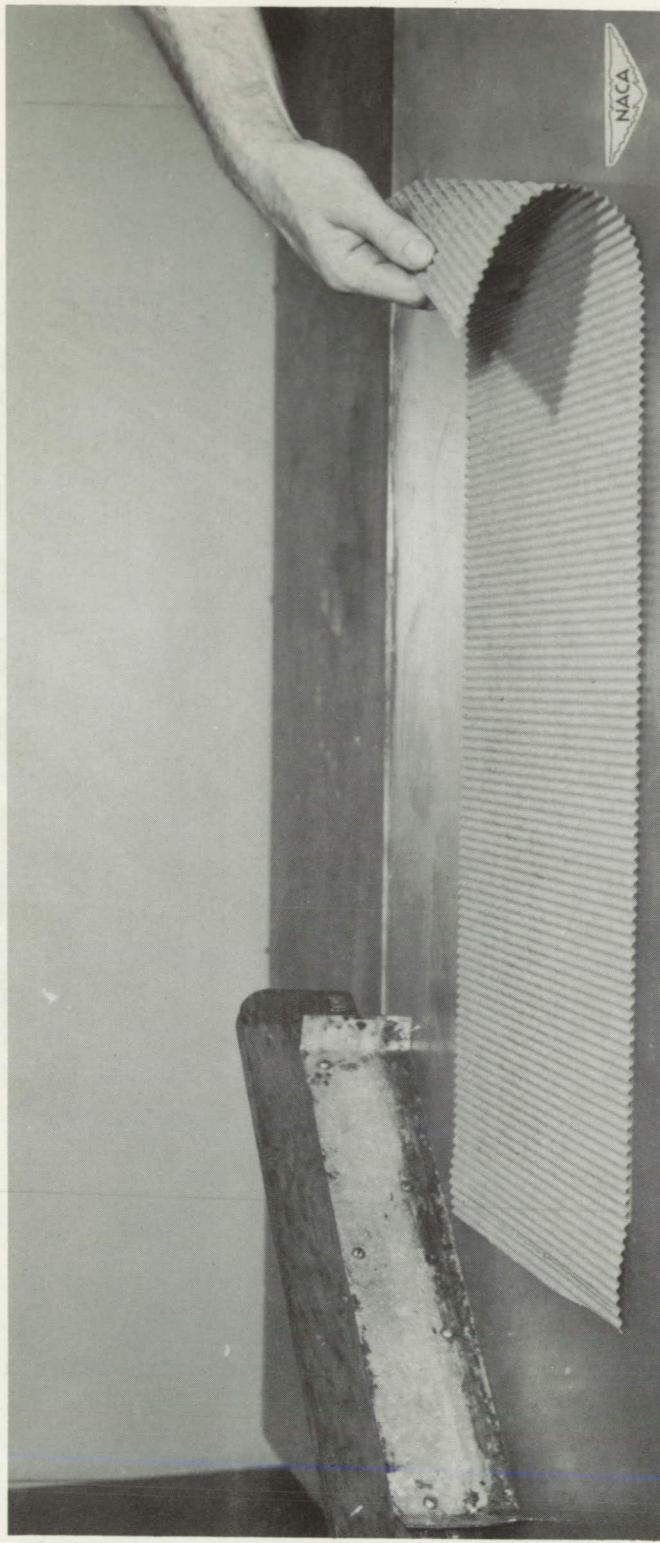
Plate-glass surface and adjustable doctor blade for applying resin to corrugated paper for resin treatment A.
